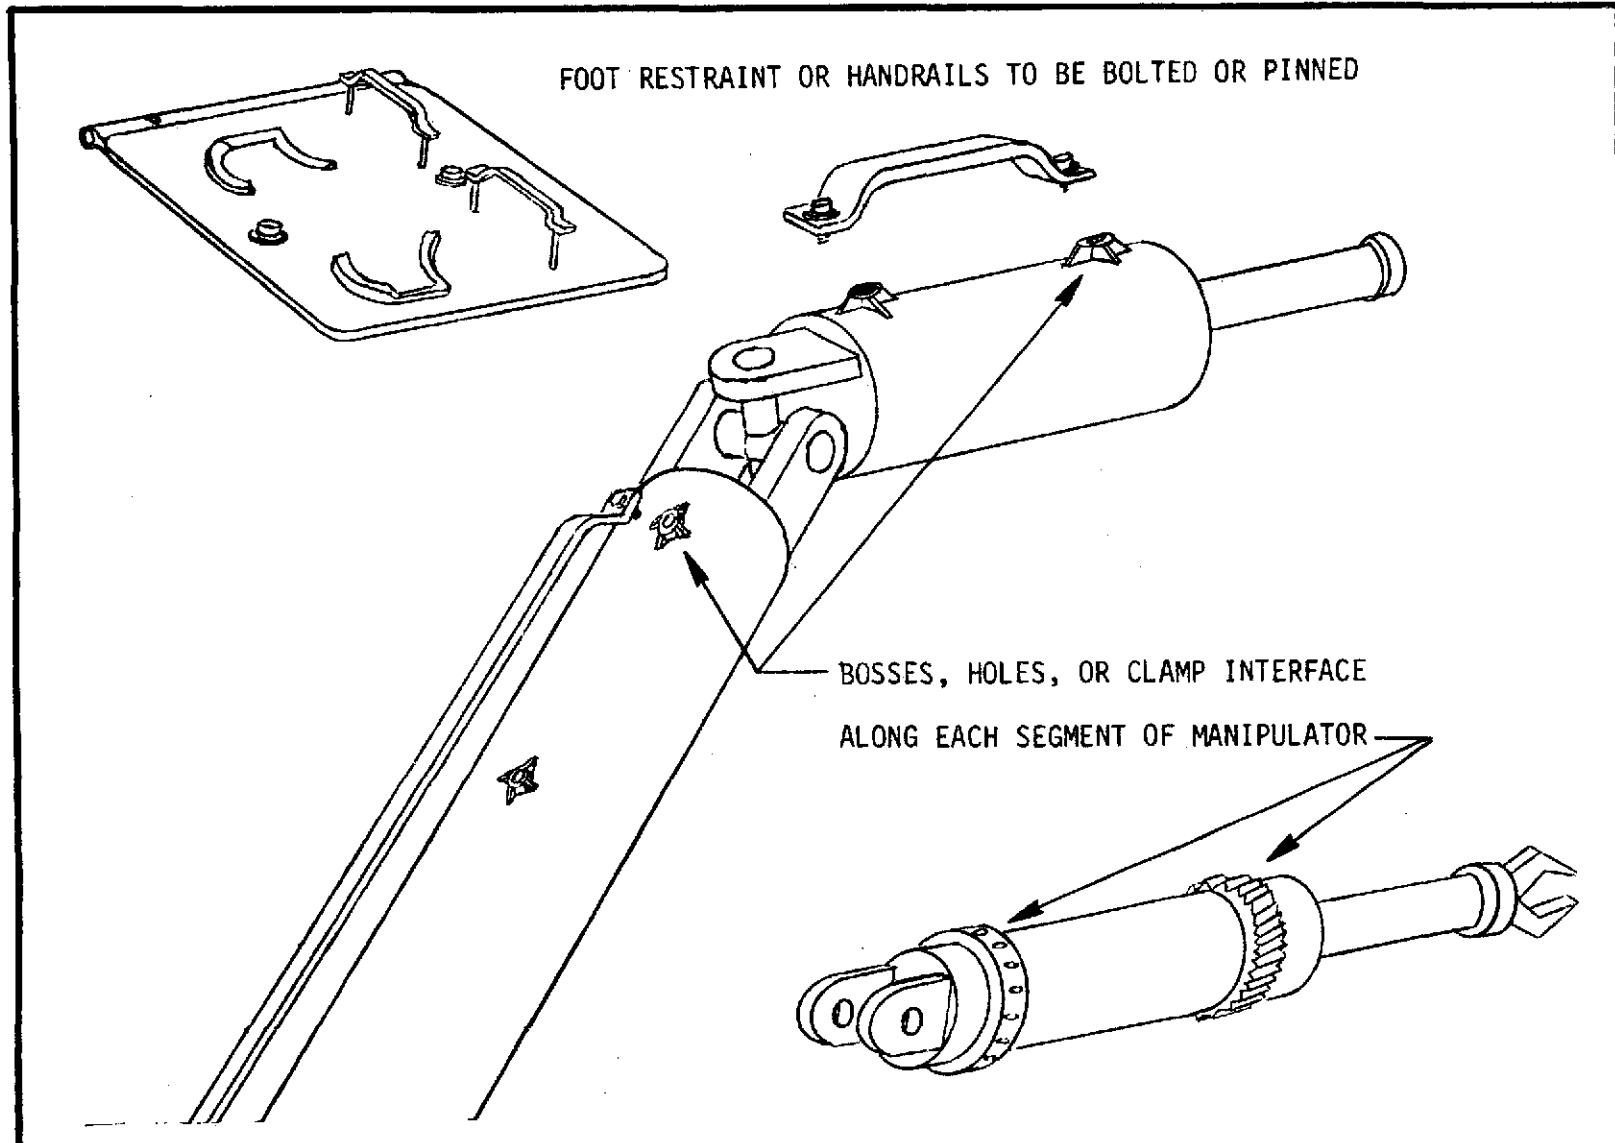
Handrail/Workstation to RMS Interface Concepts
